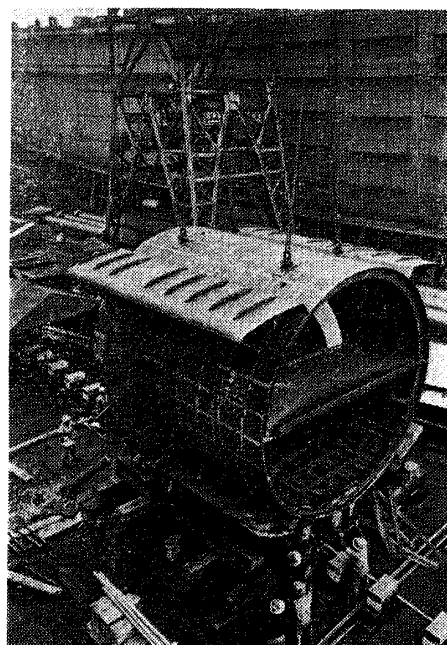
A view of erecting No. 1 inner hull assembly on the berth.
